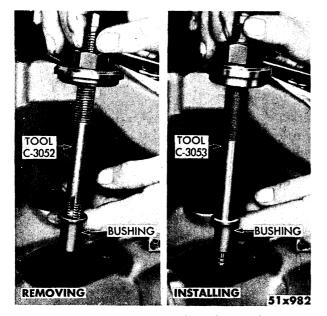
Removing and Installing the Distributor Drive Shaft Bushing
